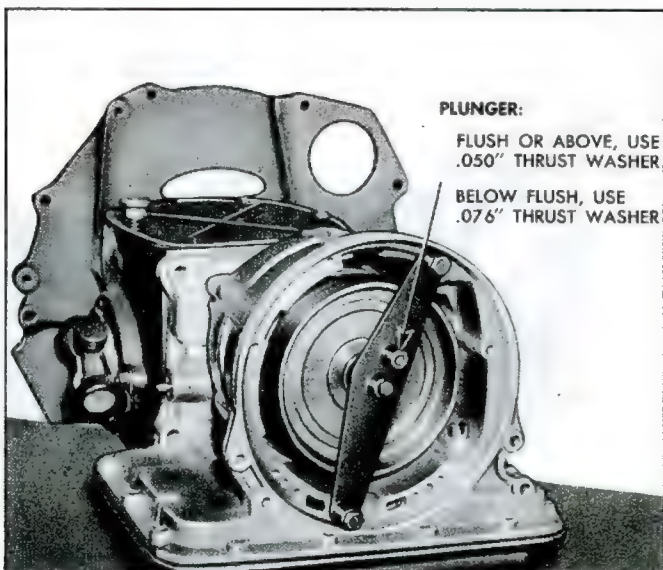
E-56—Gauging Clutch Drum Thrust Washer with J-8371
